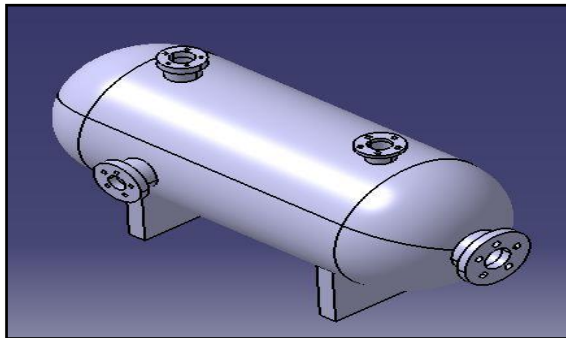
ELLIPTICAL HEAD IN CATIA
